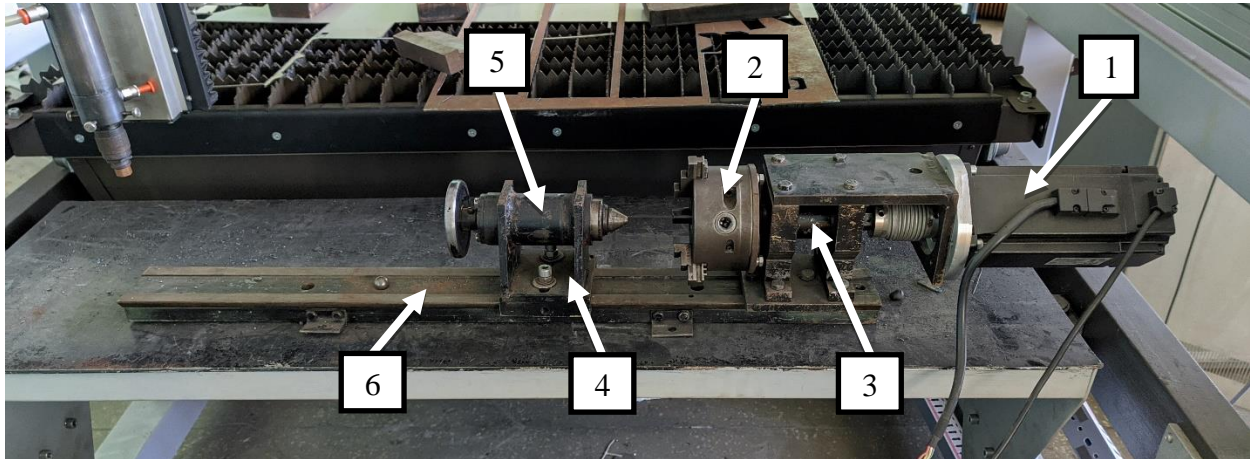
Precision rotator, where 1 – servo motor, 2 – chuck for clamping the parts of rotation, 3 – front headstock, 4 – rear headstock, 5 – rear headstock pinnacle for supporting the parts of rotation, 6 – bed
